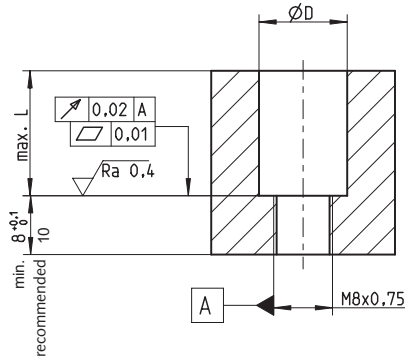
Flush mounted sensor. Bore \varnothing according to mounting tool. See picture 5 and picture 6
